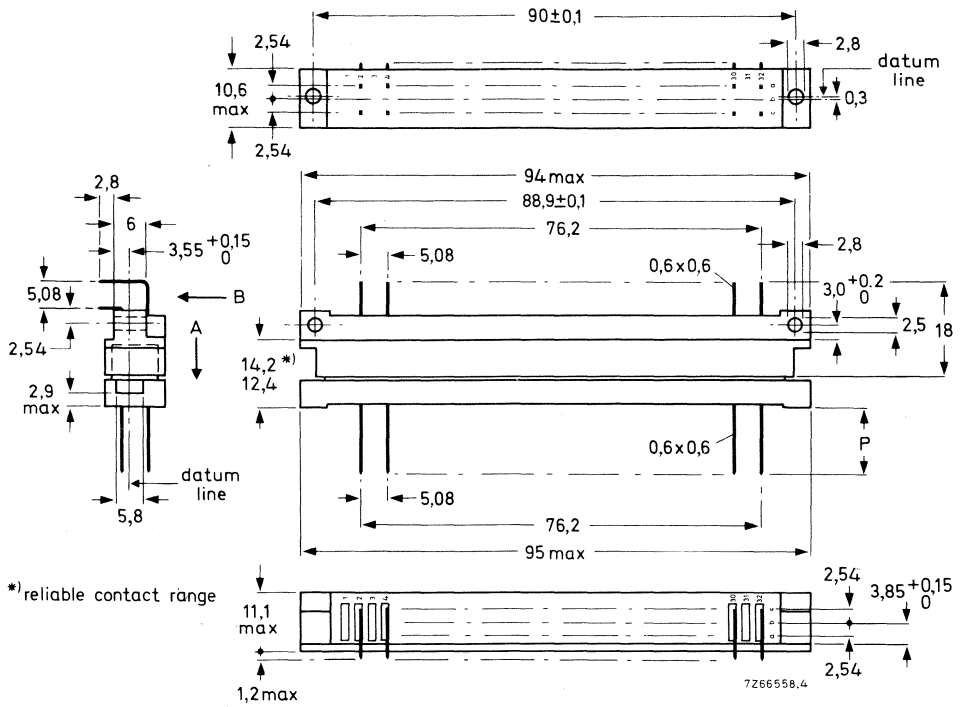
Connector with 2 x 16 contacts, showing board part with pins for dip soldering and panel part with pins for mini wire wrap. Dimension P is 4 mm for pins for dip soldering or 13 mm for pins for mini wire wrap. Arrows A and B have been drawn for sake of clarity; they indicate the direction of viewing when making the piercing diagrams (Figs. 5 and 6).
